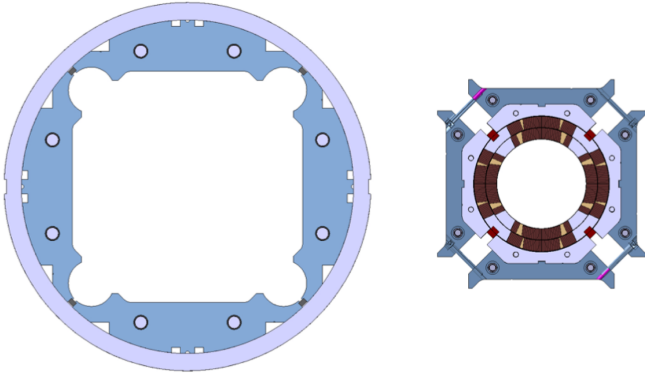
(Left) Shell yoke subassembly, and (Right) Coil Pack subassembly.
